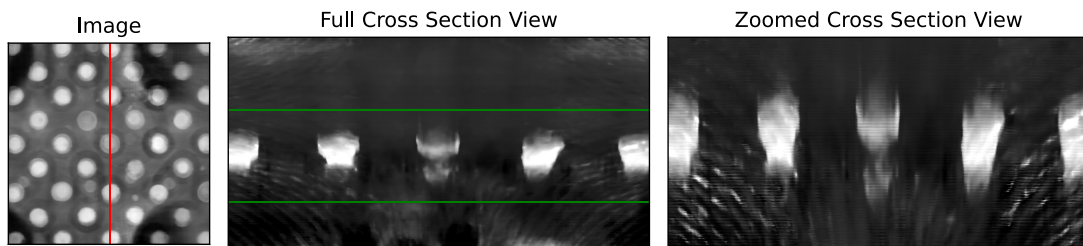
The cross-sectional view of a solder melt defect that is causing an open circuit for the bump in the middle of the cross-section view.
